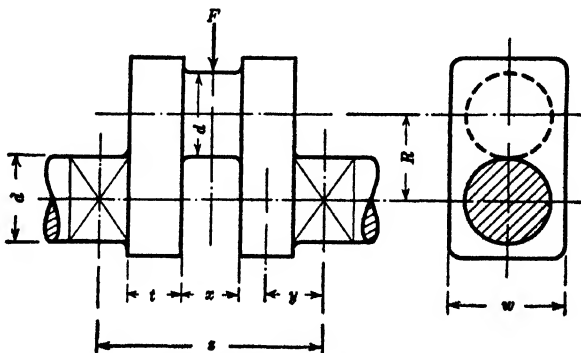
One section of a crankshaft for a multi-cylinder engine.
